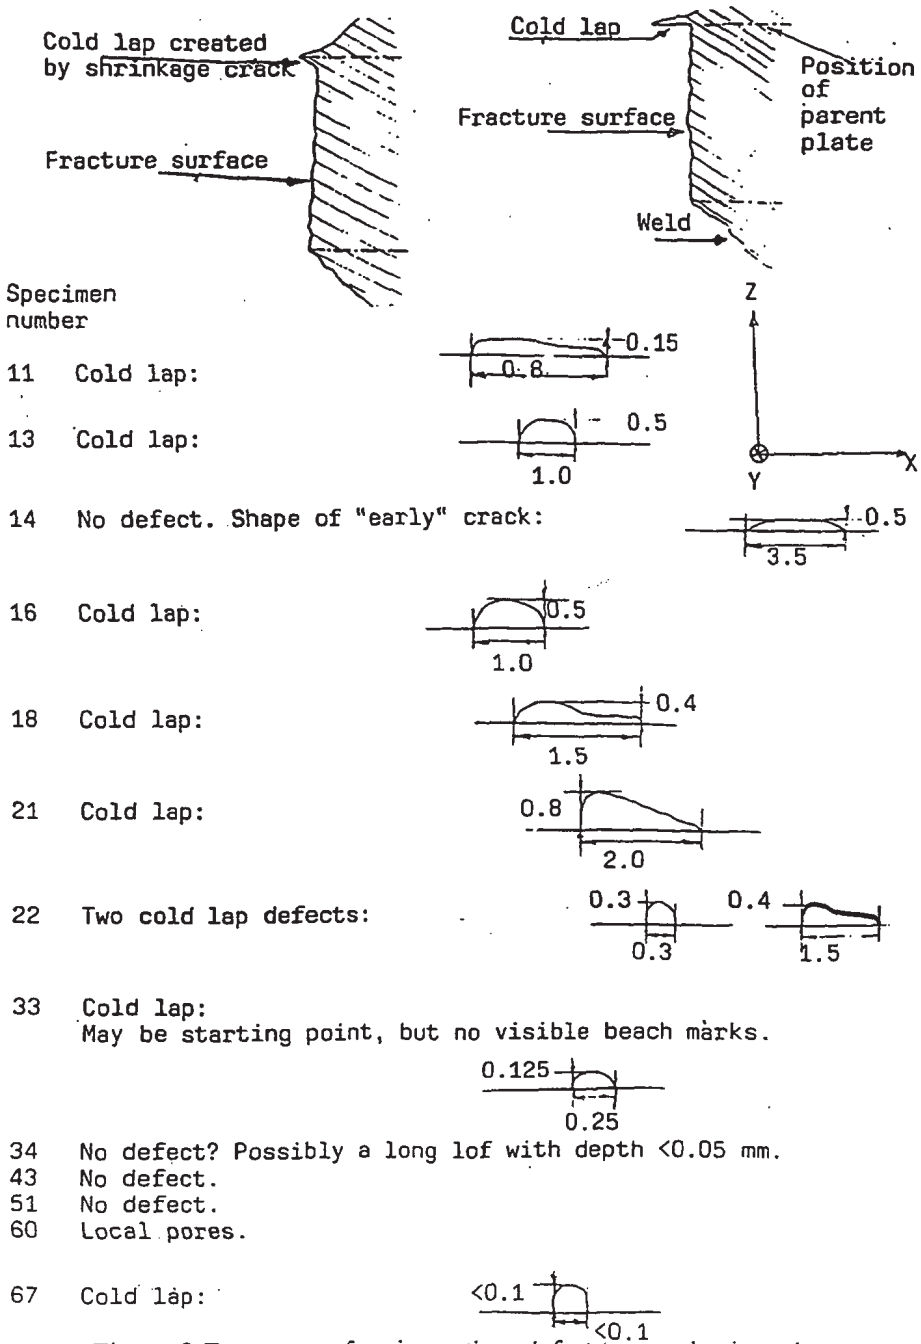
Fracture surface inspection: defect type and orientation.
